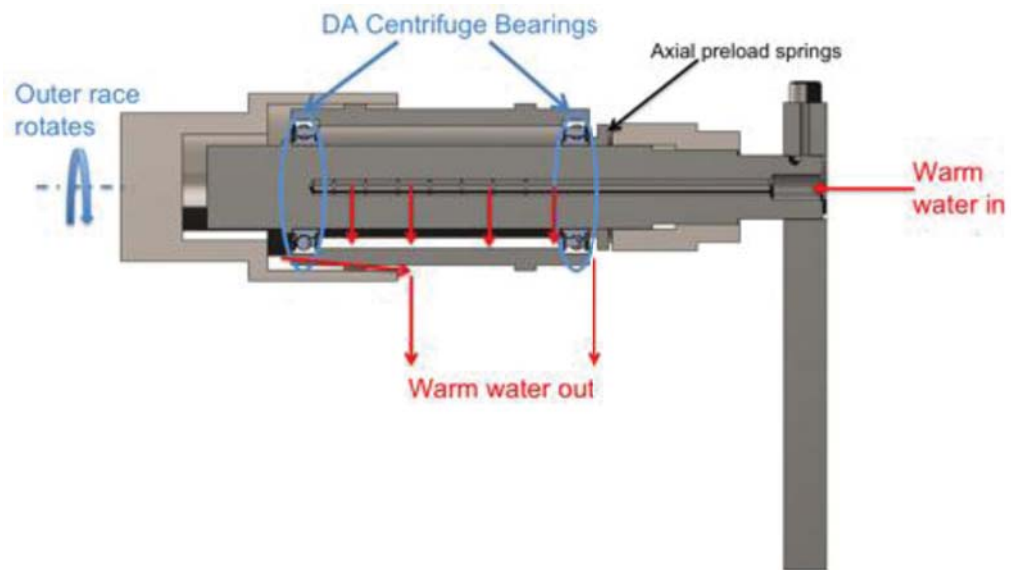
Cross-section schematic of DA bearing proof-of-concept test rig.
